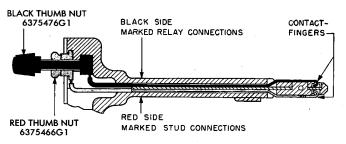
Sectional view of XLA12A test plug showing internal wiring
